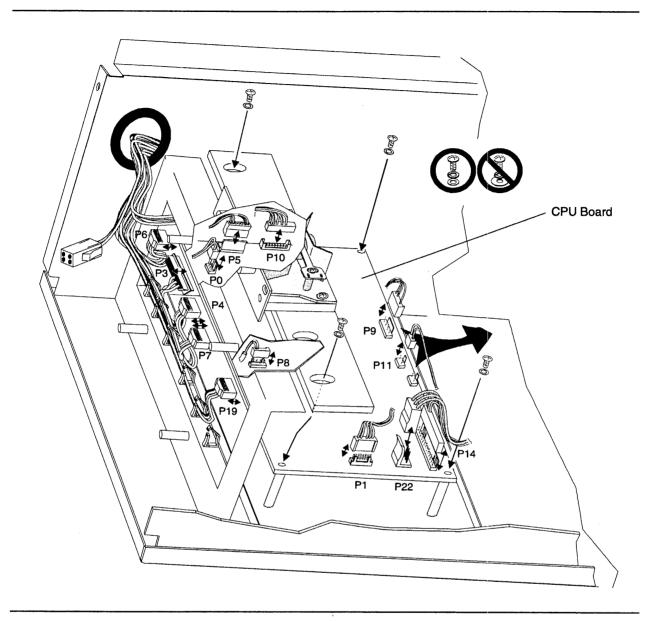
Removing the Lower CPU Board (PAGS-1000)
